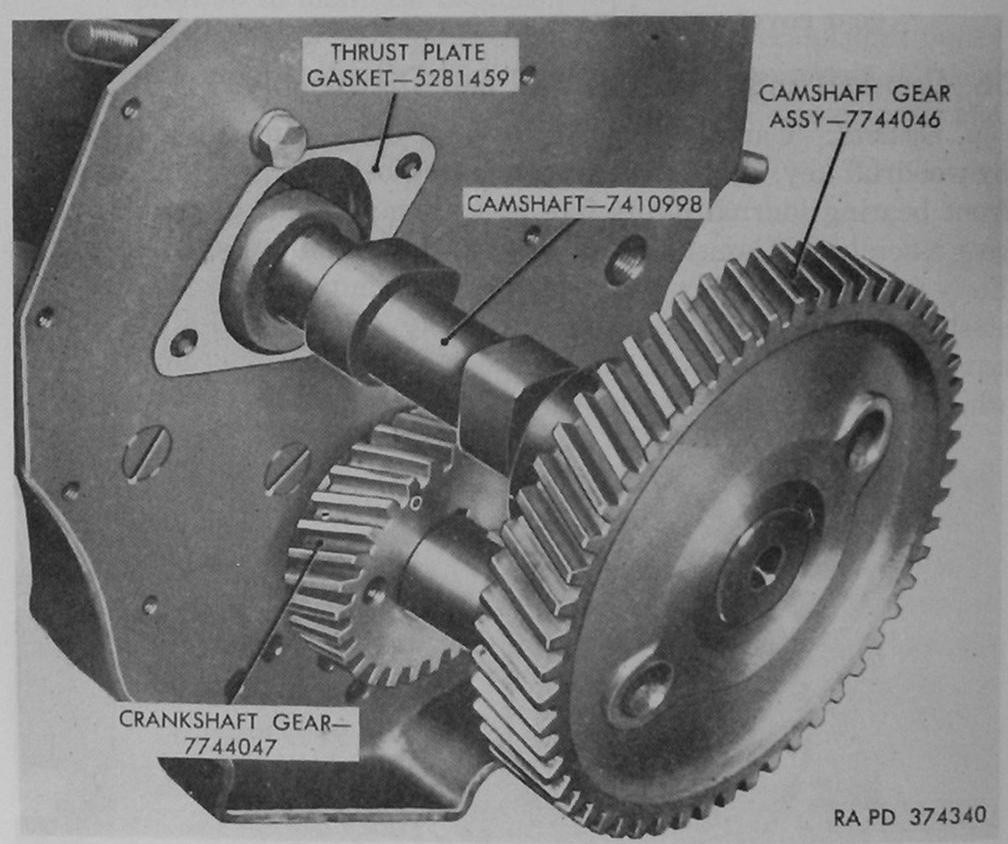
Camshaft and gear assembly partially removed (early engine assembly 7411599 shown).
